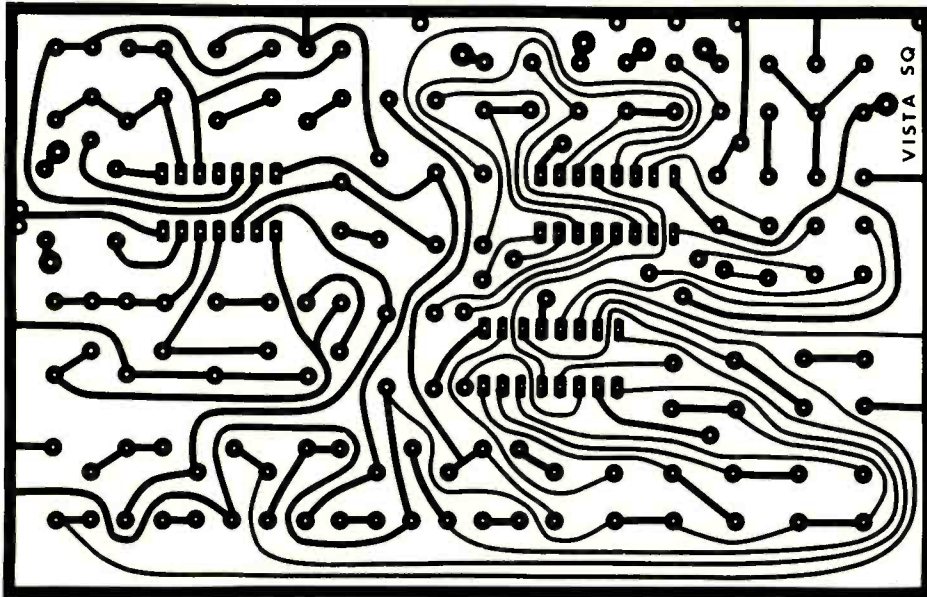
FOIL PATTERN of the decoder shown full size. This is the improved updated version, while the photograph on the front cover shows the original prototype.
